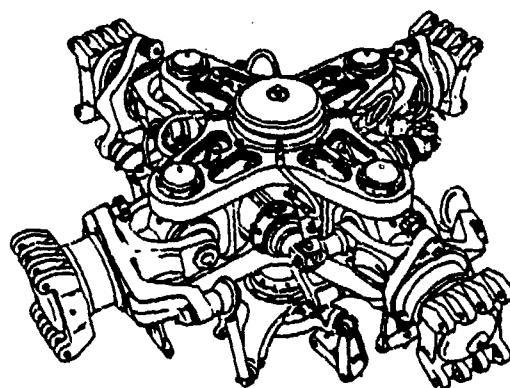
ROTOR HEAD OF SIKORSKY S-58
